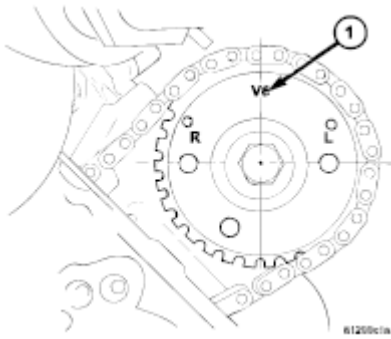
Identifying V6 Mark On Camshaft Sprocket
